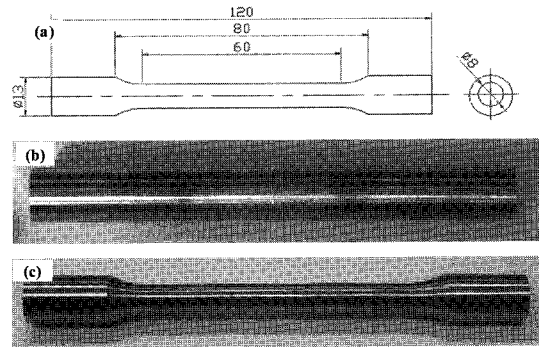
Dimension and shape of a specimen for tensile test; (a) dimension, (b) after heat treatment and (c) after machining.
